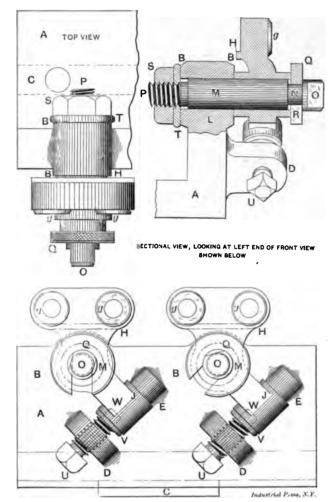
Fixture Used for Face Milling both Sides of the Irregular Shaped Casting shown in Fig. 3.
